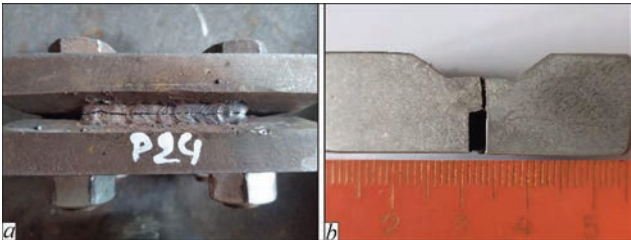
Cold crack in a sample in welding without preheating: top view (a), transverse section (b)
